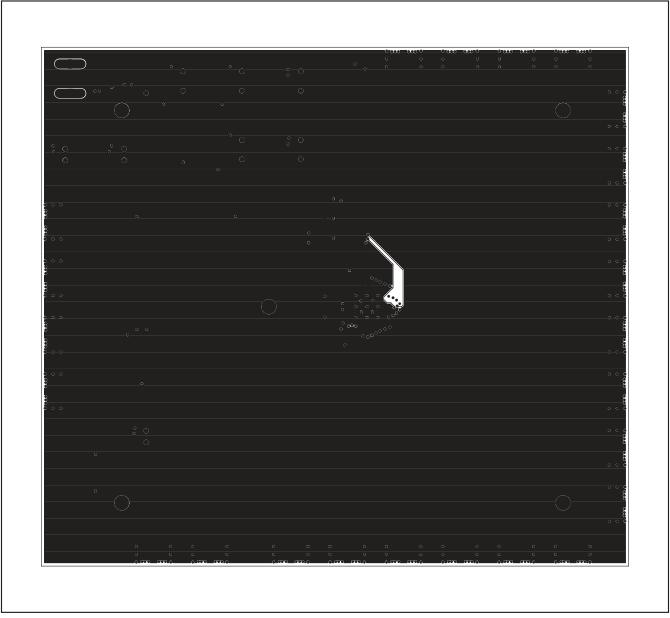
MAX3673 EV Kit PCB Layout—Power Plane
